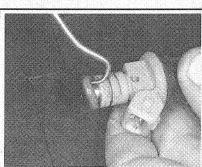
Remove the O-rings from the injectors using a small pick or other suitable tool
